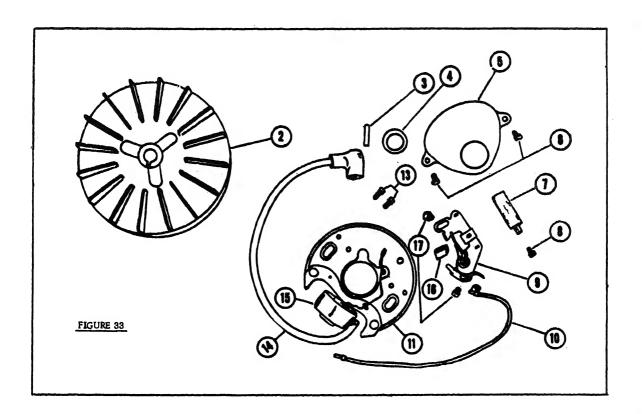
MAGNETO ASSEMBLY, EXPLODED VIEW.
